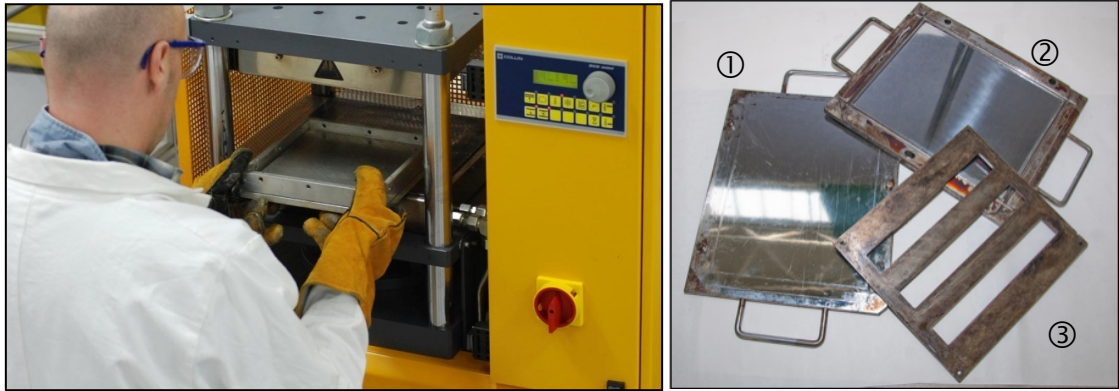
Pneumatic hot press used for rubber vulcanisation (left) with flat sheet rubber moulds (right). The polished flat sheet moulds ① and ② can be used together to vulcanise flat sheets of 200x300x2mm³ with a mirror like surface, while ③ functions as an inlay in order to vulcanise test strips of 200x30x5.5mm³. Similar moulds were used to vulcanise rubber with a rough surface.
